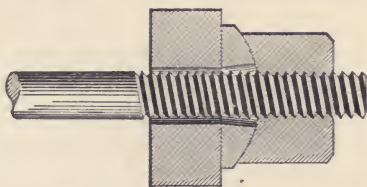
TO PREVENT BREAKING TOOL-CLAMP BOLTS.
